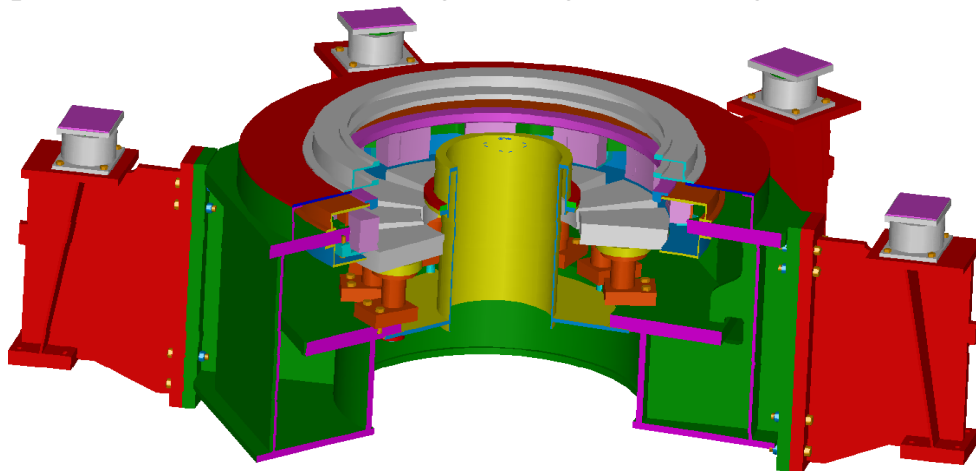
Typical combined thrust-guide bearing housing of a large hydro generator (ALSTOM Hydro)
